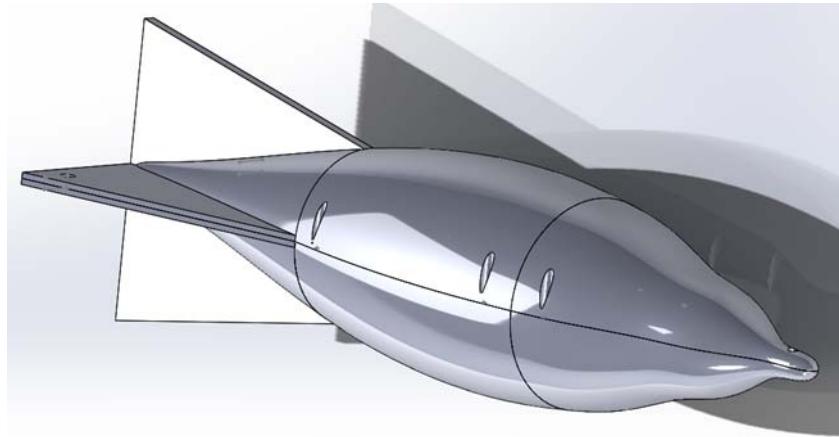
CAD rendering of final penguin robot body design with holes for screws and “rocket-like” rear stability fins.
